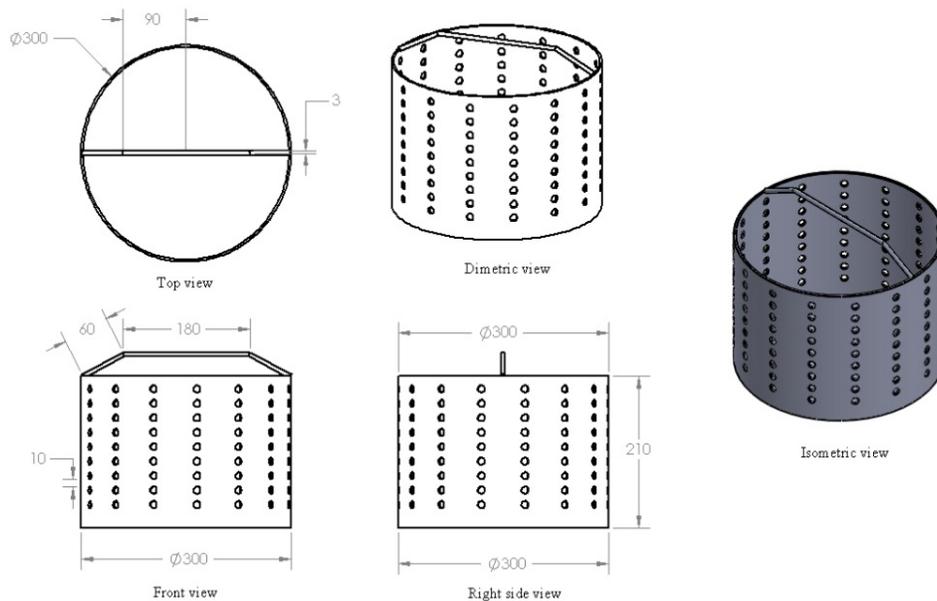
Schematic view of the sample holder for the vacuum frying unit.
